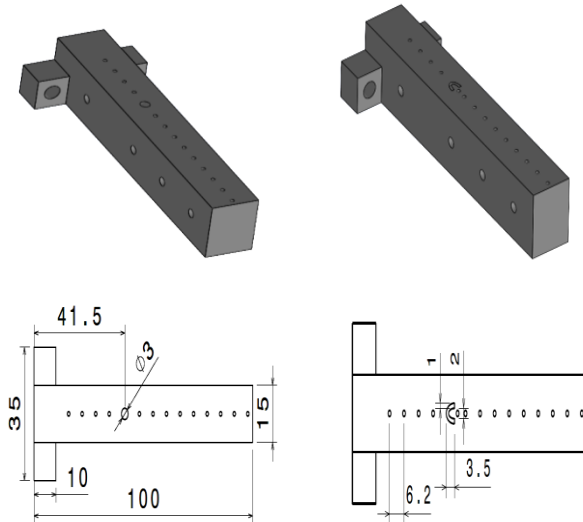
Circular and Arc injection in the combustor model bottom plate and all dimension are in mm
